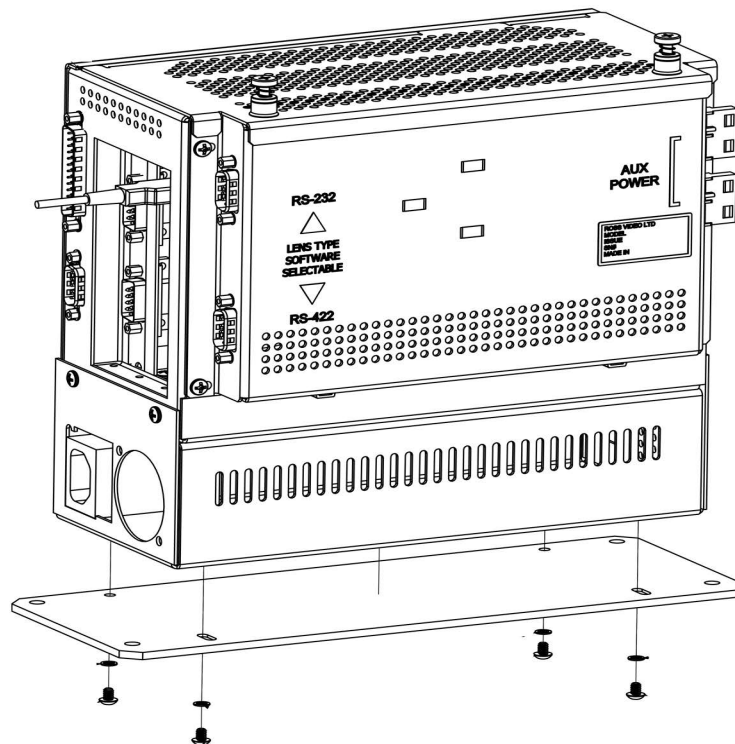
Mounting Plate, Showing Round Holes and Slotted Holes
